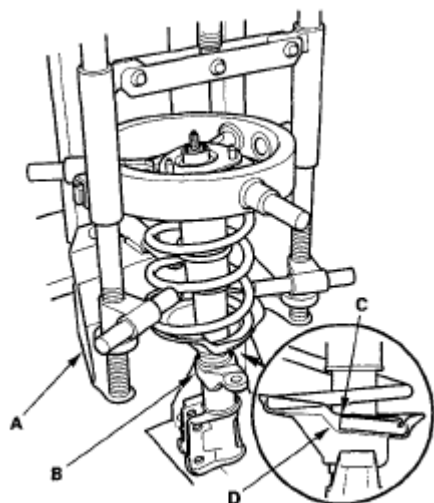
Identifying Upper Spring Seat And Spring On Strut Spring Compressor
